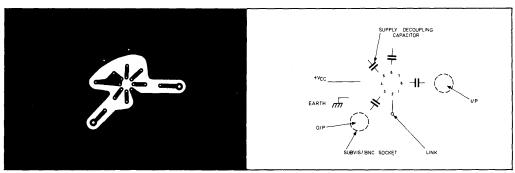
PC layout for 50- Ω line driver (see Fig. 6)
